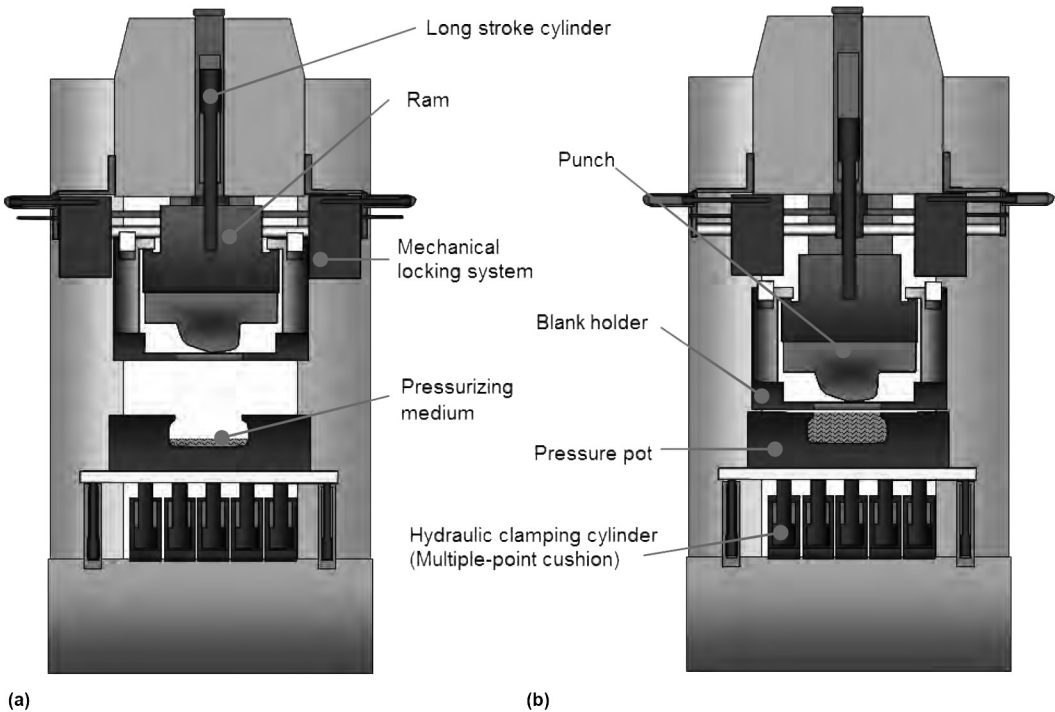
Sheet hydroforming with punch short-stroke press. (a) Open position. (b) Closed position. Mechanical locks are engaged, and hydraulic clamping cylinders apply blank holder force. Source: Ref 8.14
